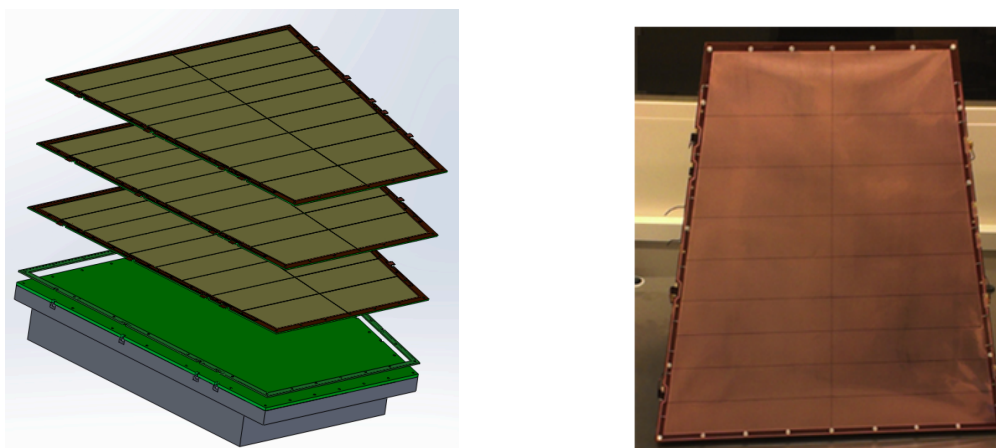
Exploded view of the mounted IROC prototype with triple GEM stack, pad plane and IROC aluminium frame and GEM stack mounted on aluminium frame [36].
